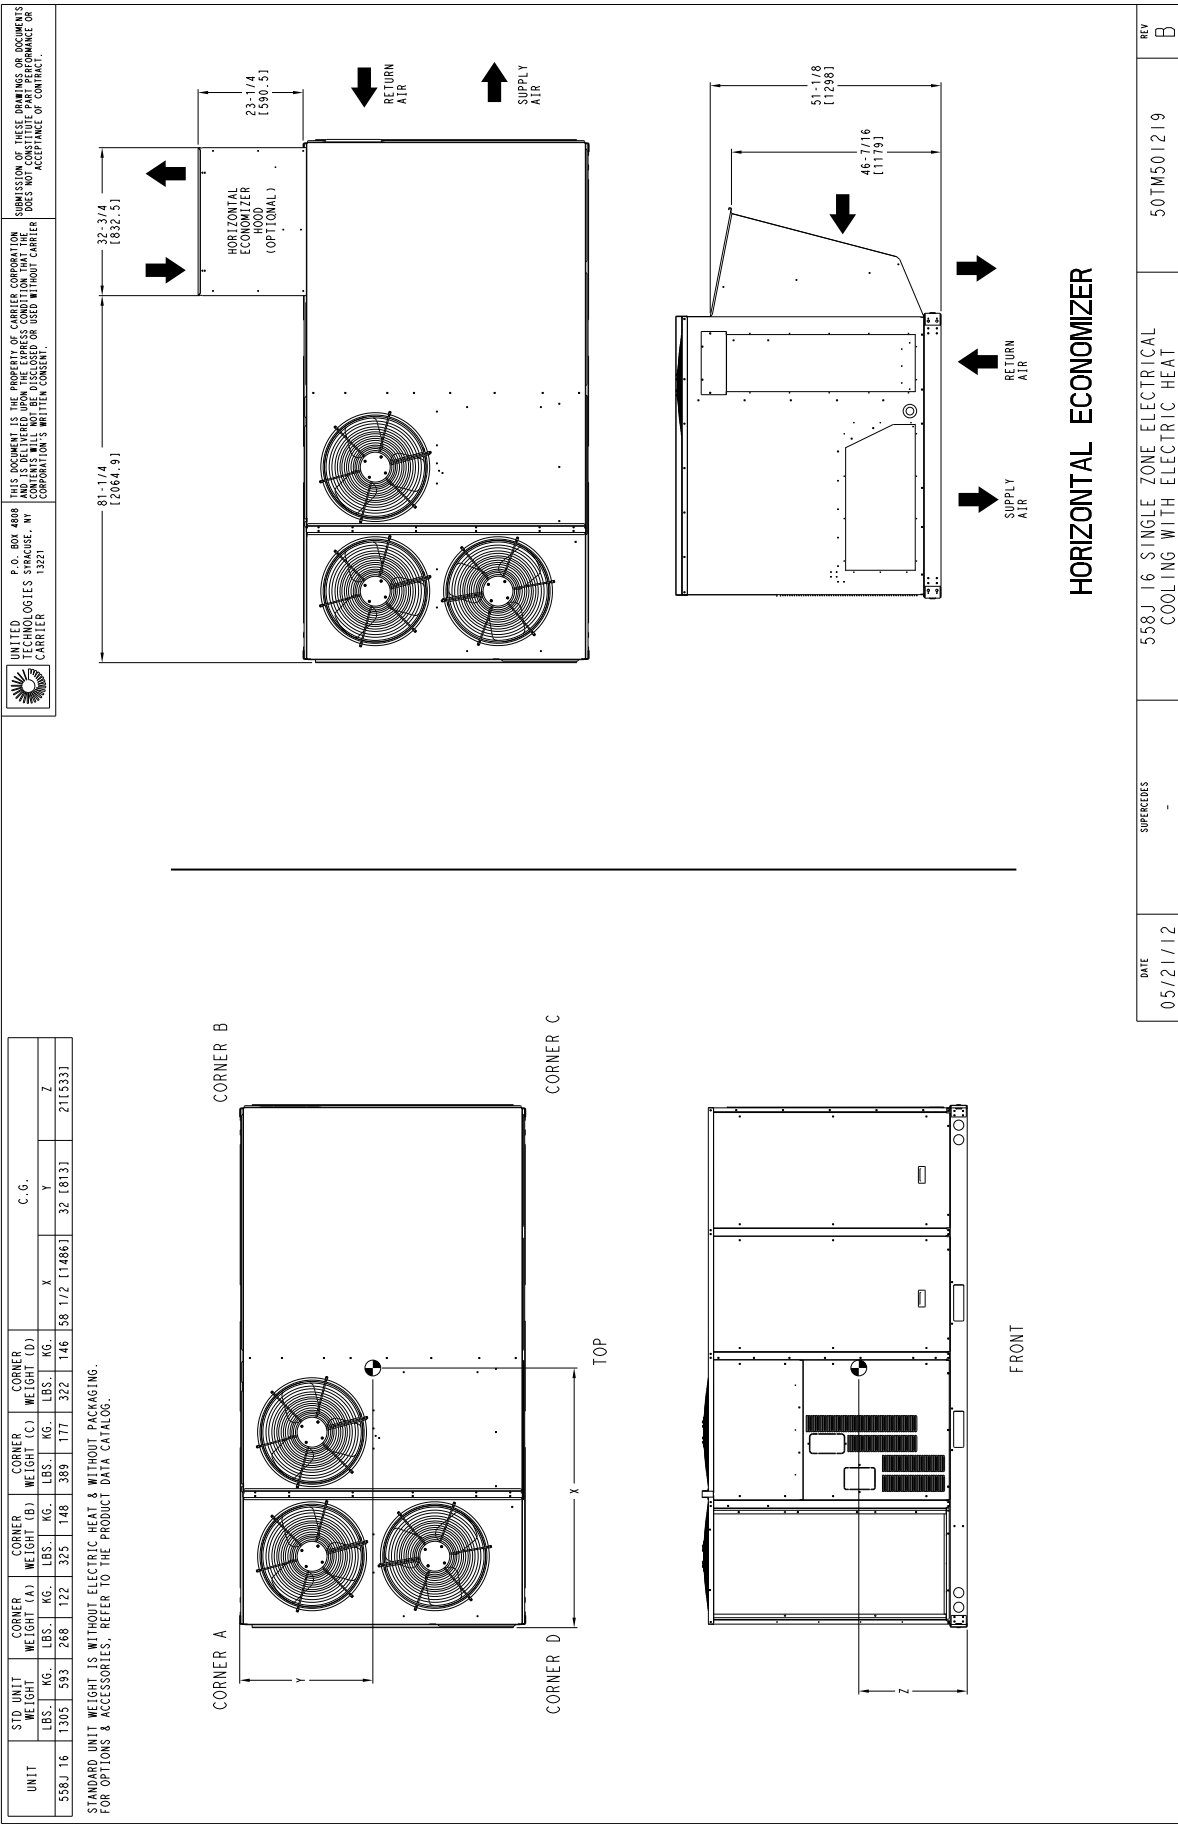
Dimensions RAS180 (Sheet 2 of 2)
